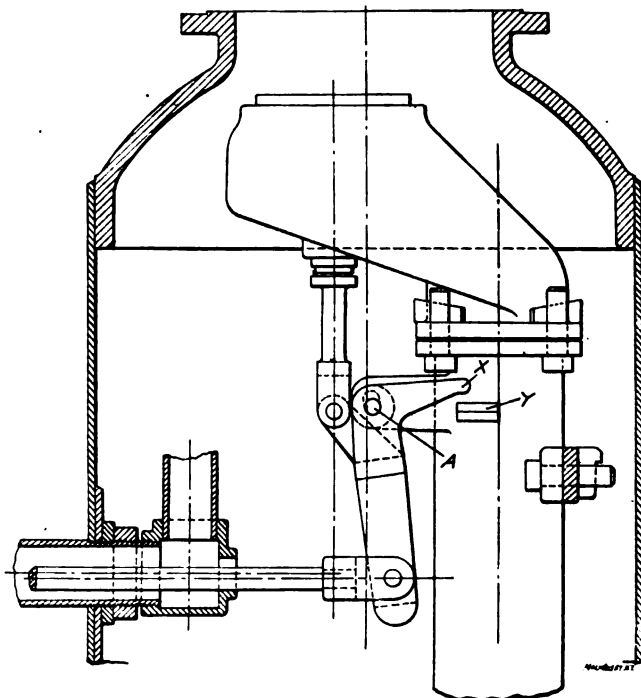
Section of Throttle Valve with Variable Fulcrum.
